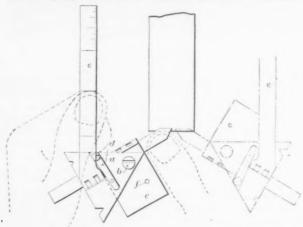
Diagram Illustrating the Use of the Krieger Tool Sharpening Gauge.
